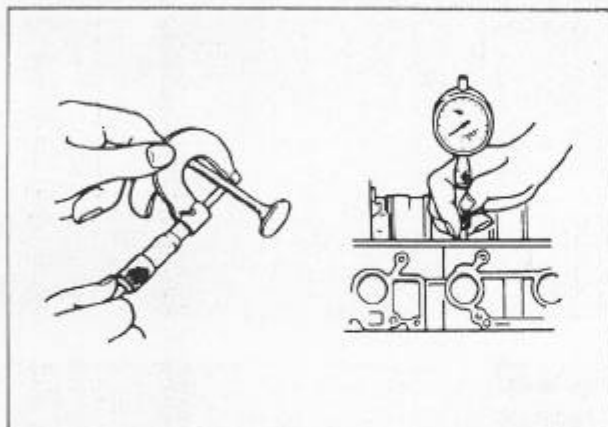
A — 54 MEASURING VALVE STEM DIAMETER AND VALVE GUIDE INNER DIAMETER
